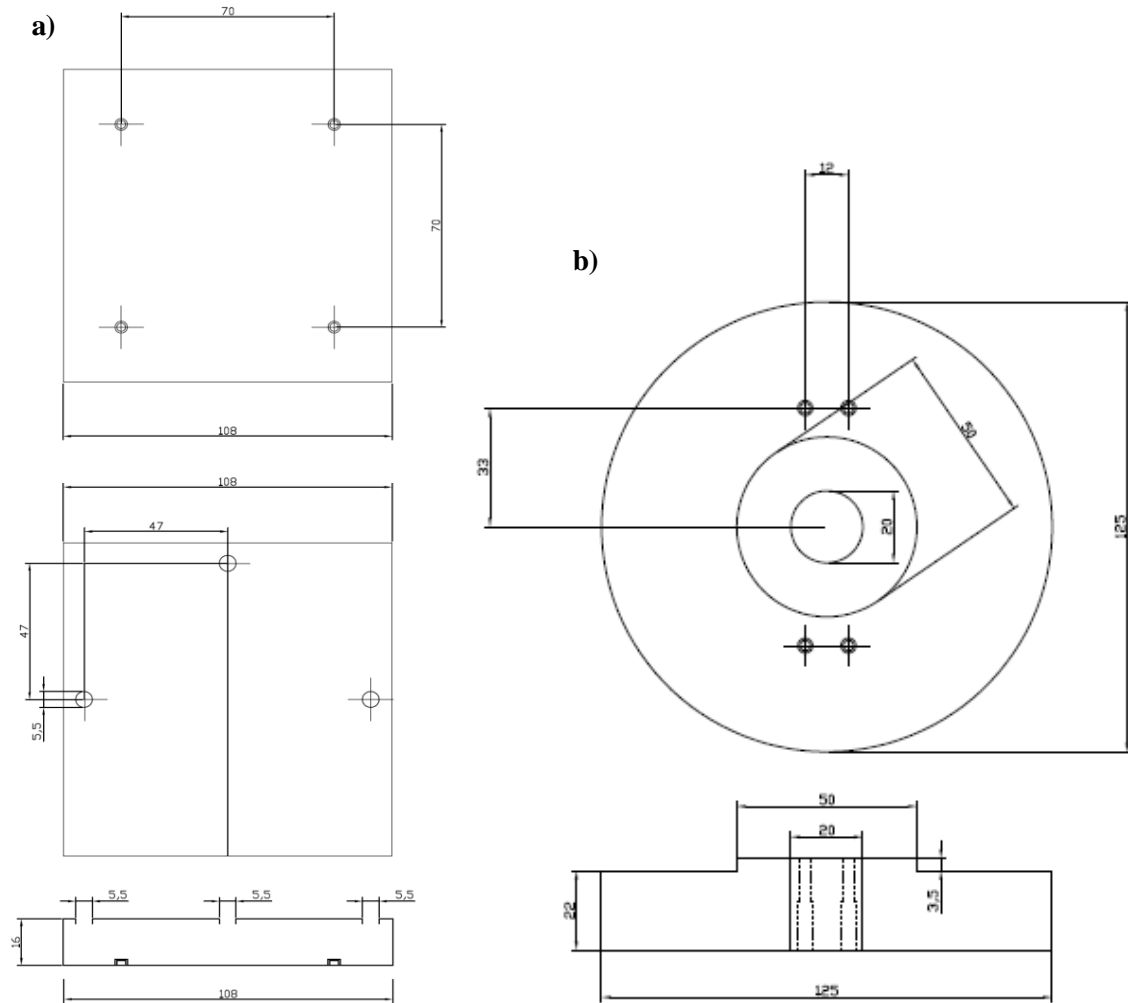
a) technical drawing of the metal peice between 1-circle goniometer (huber 408) and translation linear stage (huber 5101.1); b) technical drawing of the circle stand of monochromator
